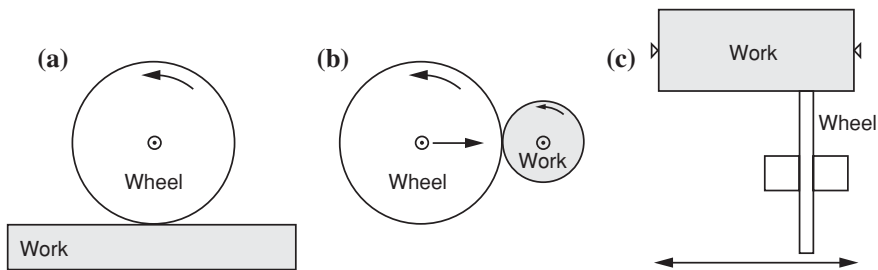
Three examples of grinding: a pendulum grinding; b plunge grinding and c roll grinding
